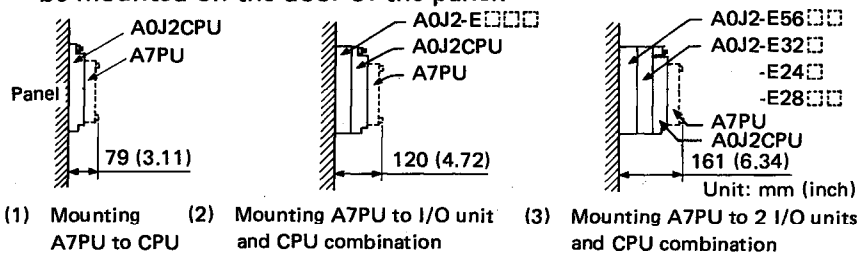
Dimensions in Unit-to-Unit Mounting
